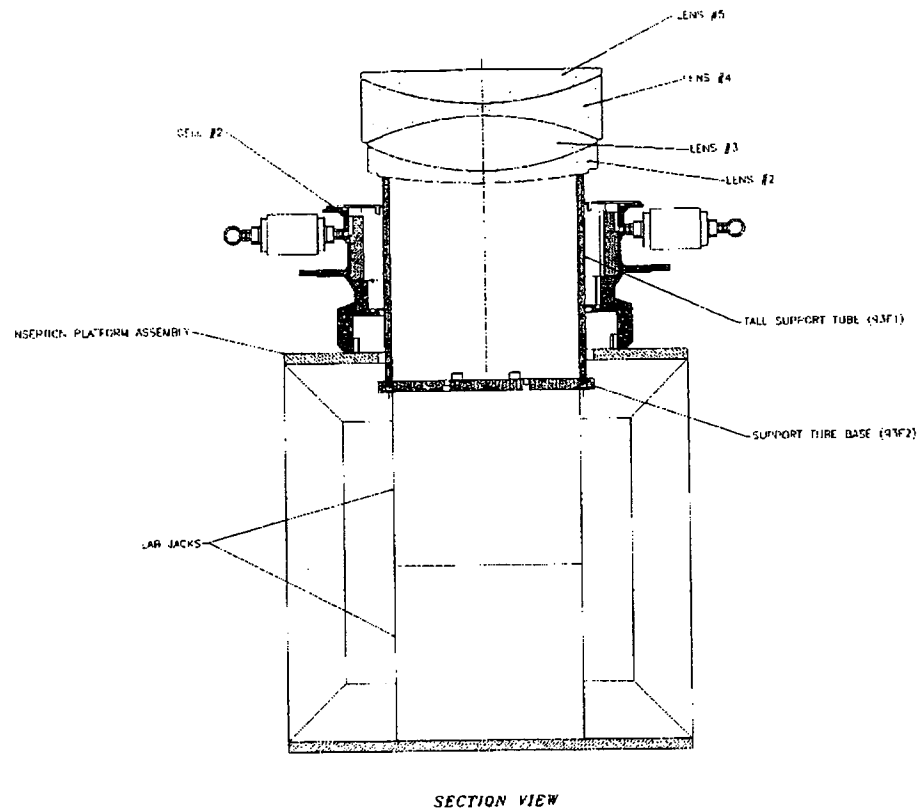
CELL #2 LENS INSTALLATION FIXTURE- SECTION
